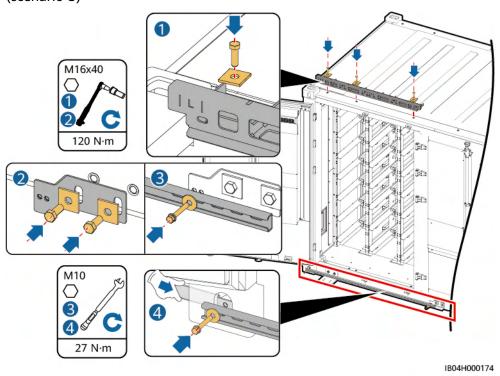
Installing the long top beam and the long bottom beam (scenario 3)
